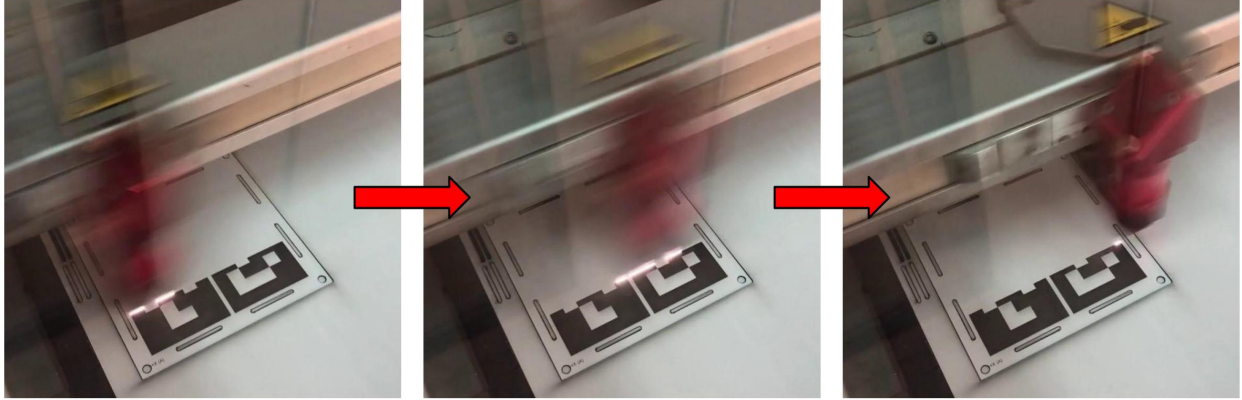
ArUco face manufacturing: laser engraving single pass
